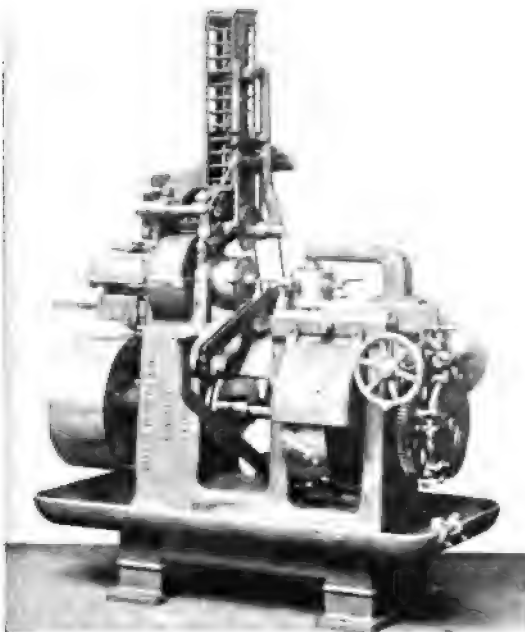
AUTOMATIC SCREW MACHINE, WITH
